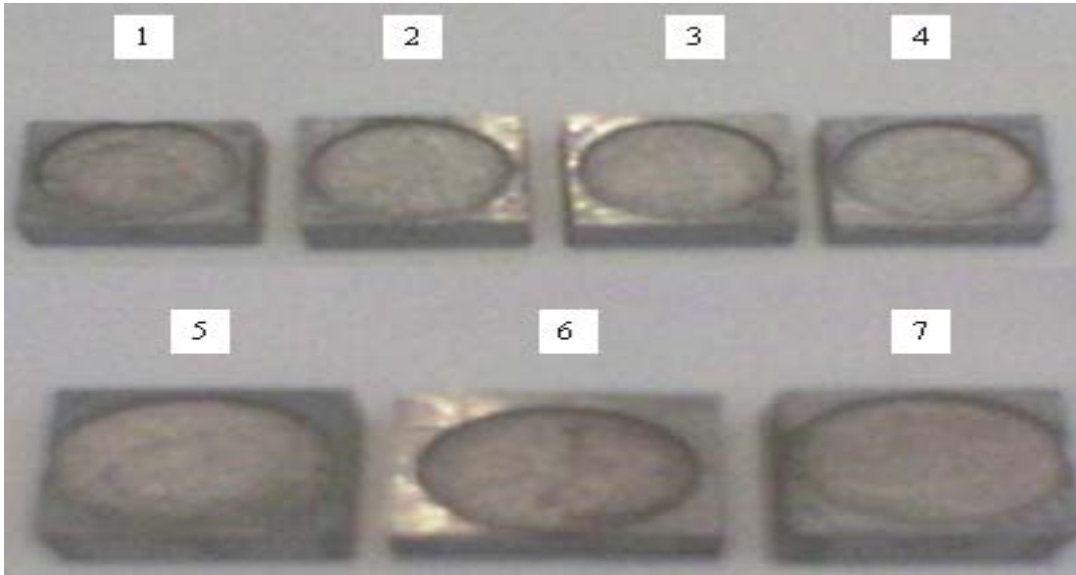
Showing straight polarity machined surfaces numbering 1 to 7.
